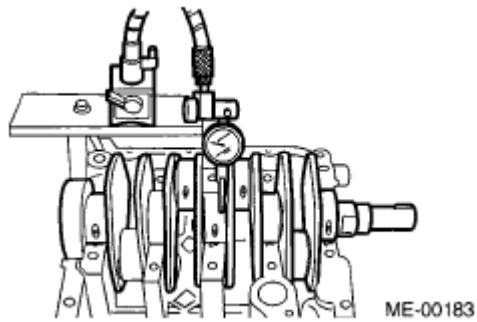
Measuring Crankshaft Bending Using Dial Gauge
